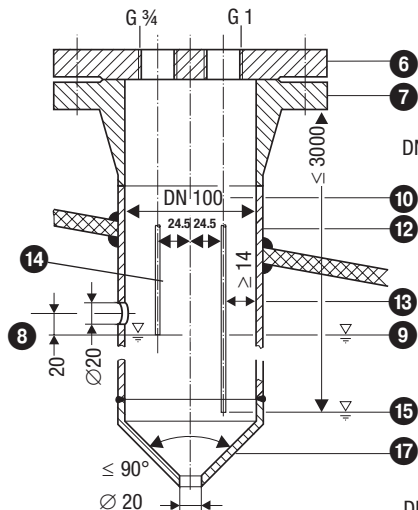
Protective tube (provided on side) for internal installation in combination with other GESTRA equipment
